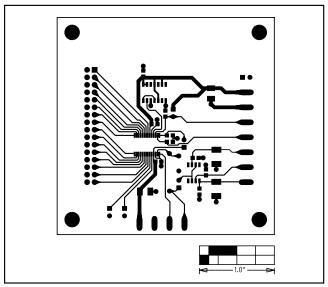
MAX1179 EV Kit PC Board Layout—Component Side
